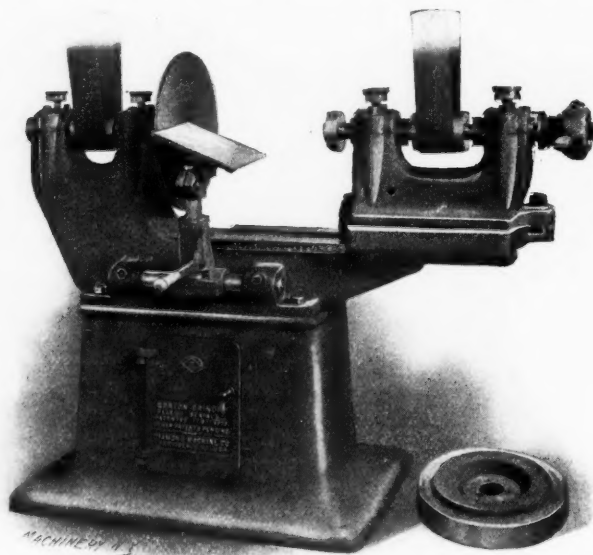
Gorton Double Disk Grinder used as a Single Head Grinder.
